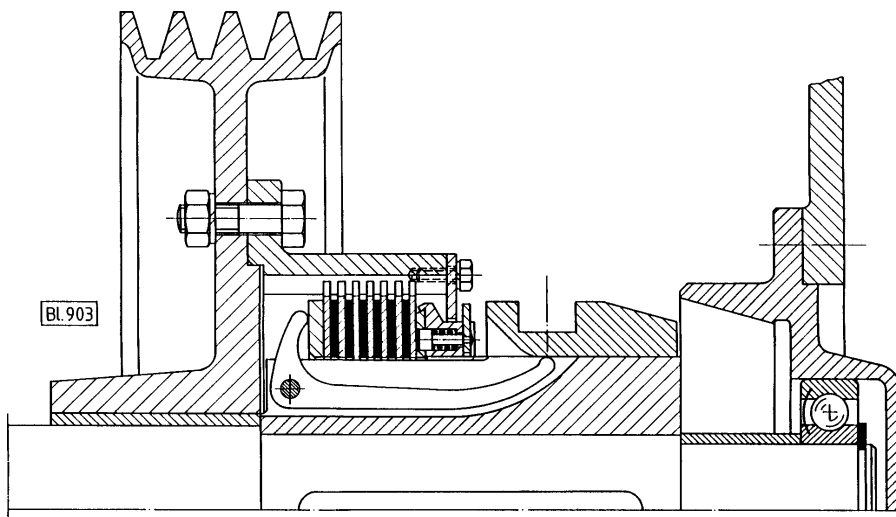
Sinus® multi-plate clutch, series 0100-010-, with flange housing and brake cone. To enable the plate carrier, which sits on the drive shaft, to be stopped immediately when the clutch is disengaged, the sliding sleeve is fitted with a brake cone, which - when the clutch is disengaged - is pressed into a matching female cone mounted on the machine frame.
